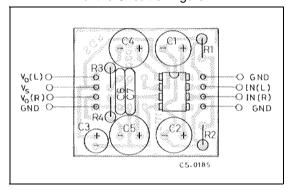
P.C. Board and Components Layout of the Circuit of Figure 2
